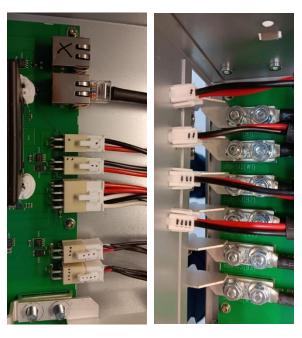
Meter Board with plug in connections and 2 straight DC busbars shown installed in this 60 kW Bi-Directional Charger
